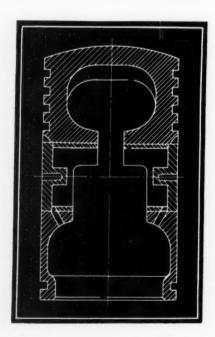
This cross section of one of the pistons illustrates the unique method of obtaining additional bearing area for the piston pin and bushing
